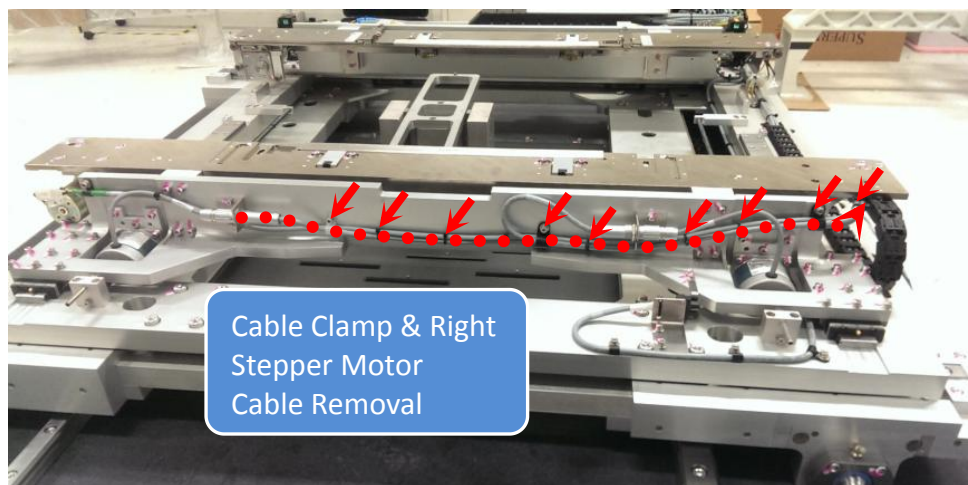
Cable Clamp & Right Stepper Motor Cable Removal
